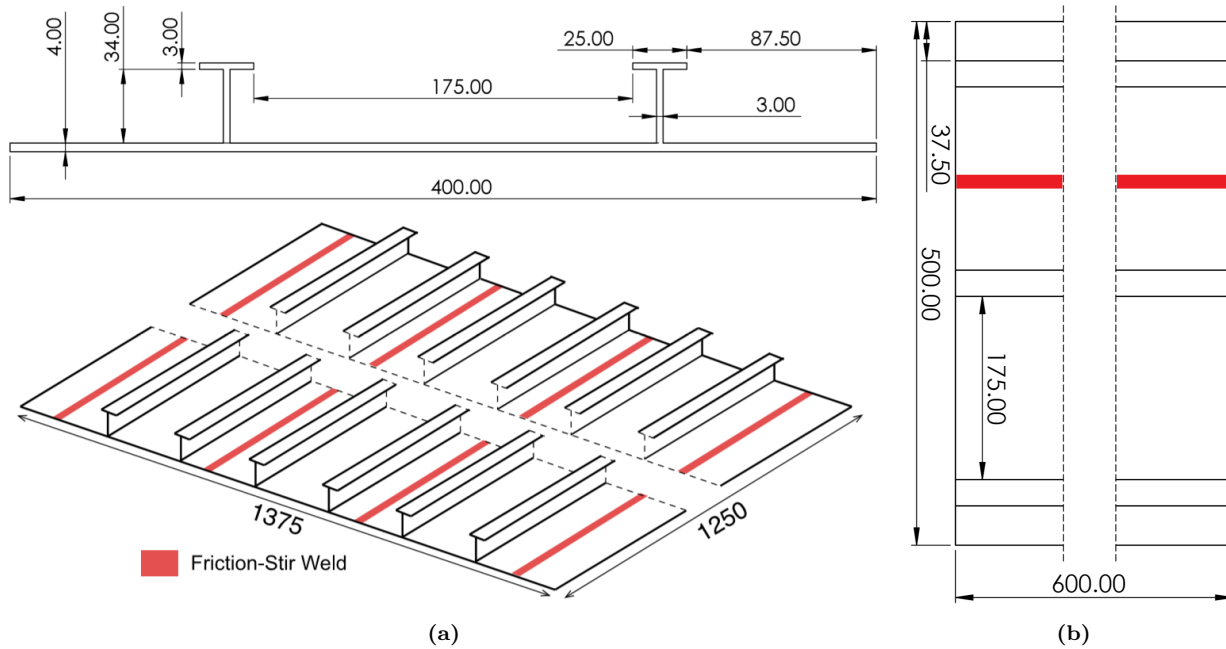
(a) Illustration of the extruded profile and the assembled panels. (b) Illustration of the milled panels tested in the shock tube facility.
